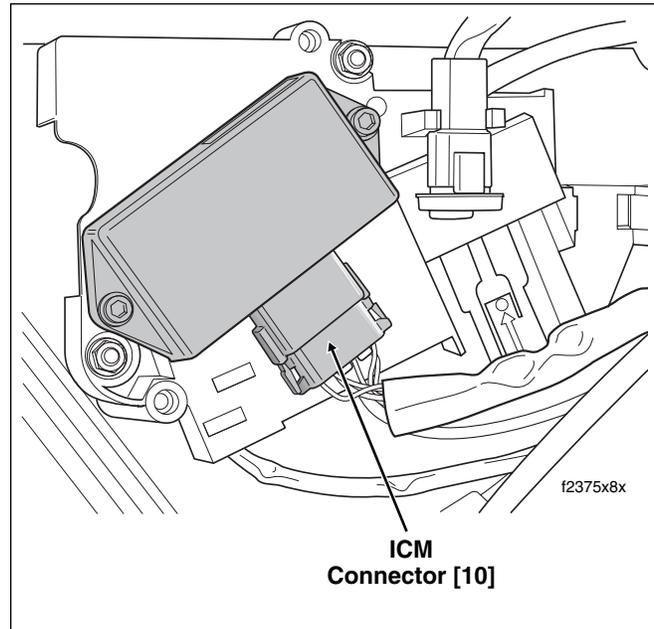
Electrical Bracket (Under Right Side Cover)
